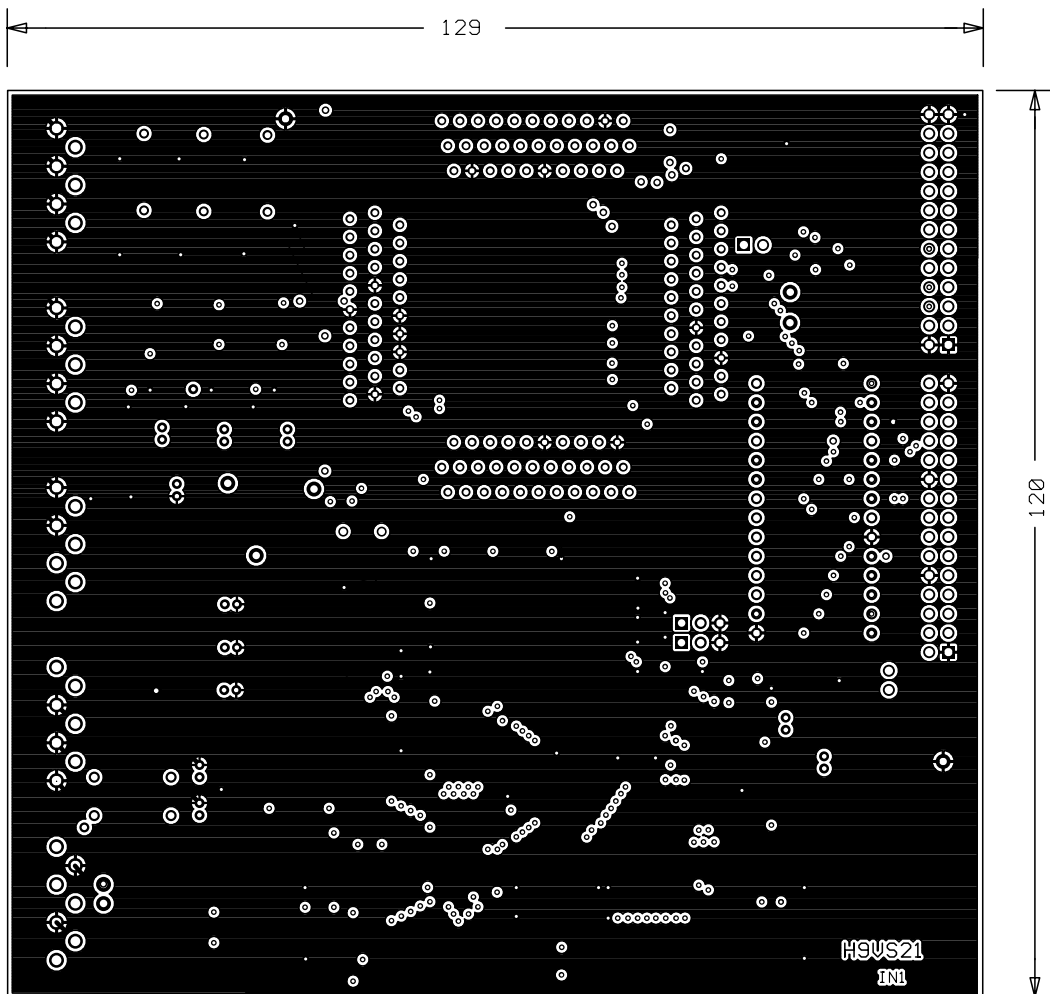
IPQ module MK12 board layout: layer 1 (top)
